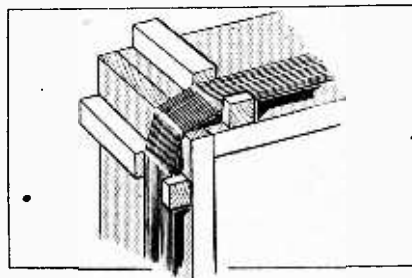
Frame aerial supported on slotted battens, providing air spacing between the winding container and wooden framework.
